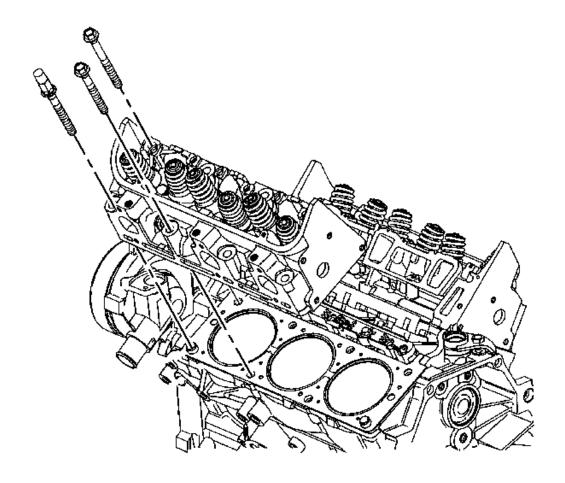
Removing Left Cylinder Head Courtesy of GENERAL MOTORS CORP.
